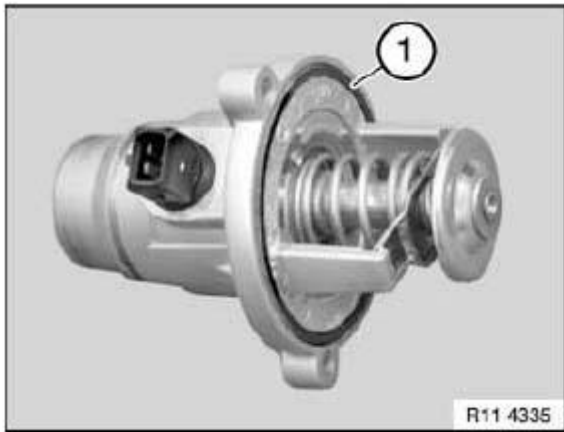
Identifying Coolant Thermostat Sealing Ring
